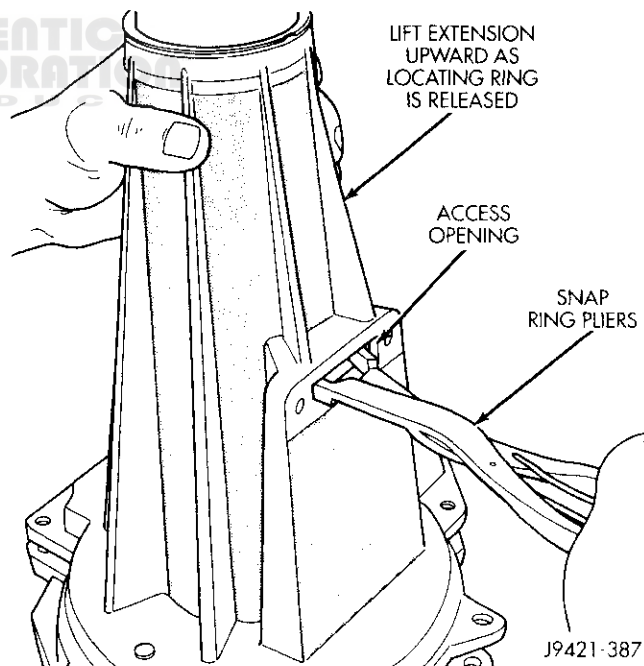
Releasing Mainshaft Bearing Retaining Ring
